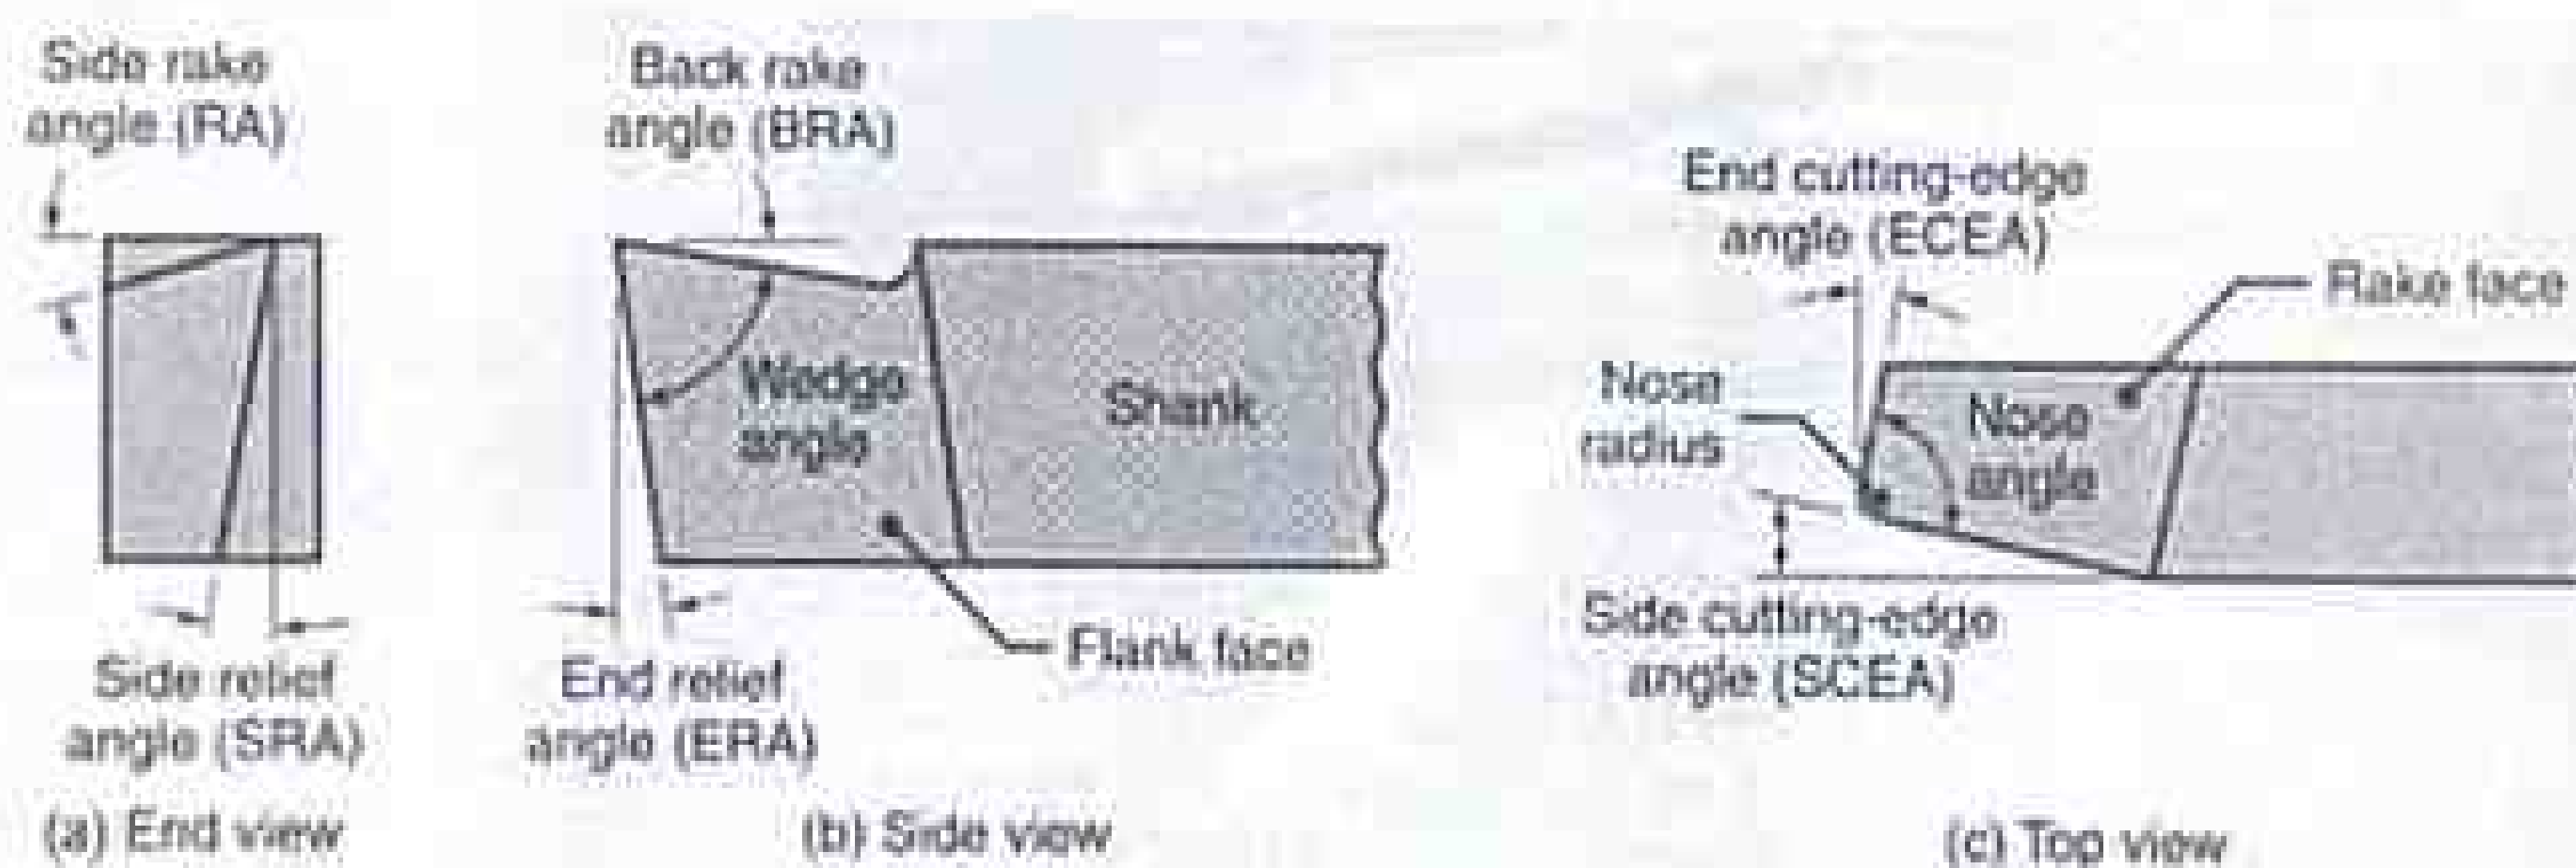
Designations for a right-hand cutting tool, meaning that the tool travels from right to left, as shown in Fig. 23.3b.
